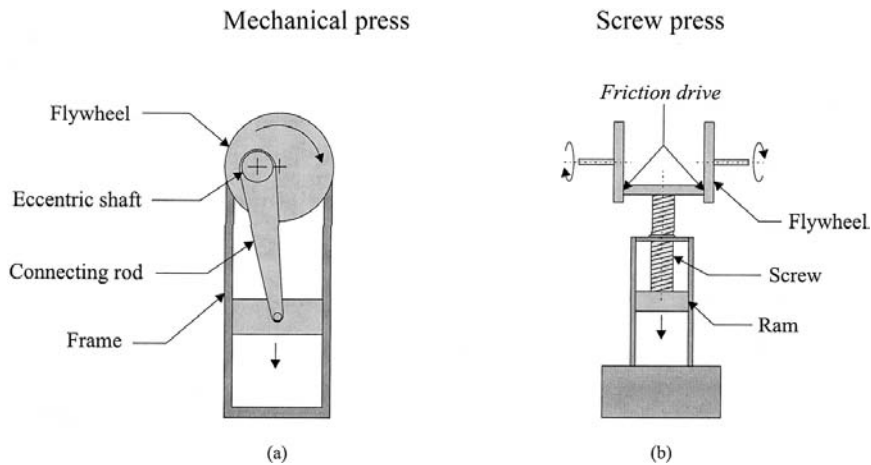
(a) Mechanical forging press; (b) screw press.
